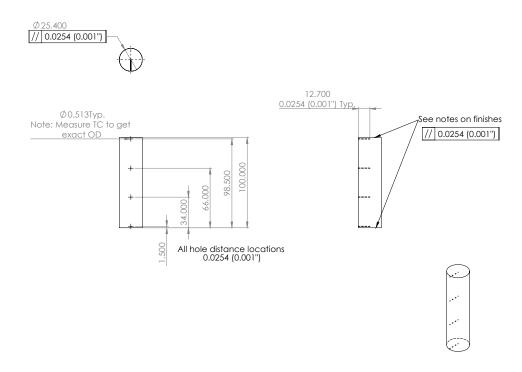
Machine drawing showing the nominal geometric specifications for test specimens, dimensions are in mm. For clarity, critical tolerances are called out in both mm and in.
